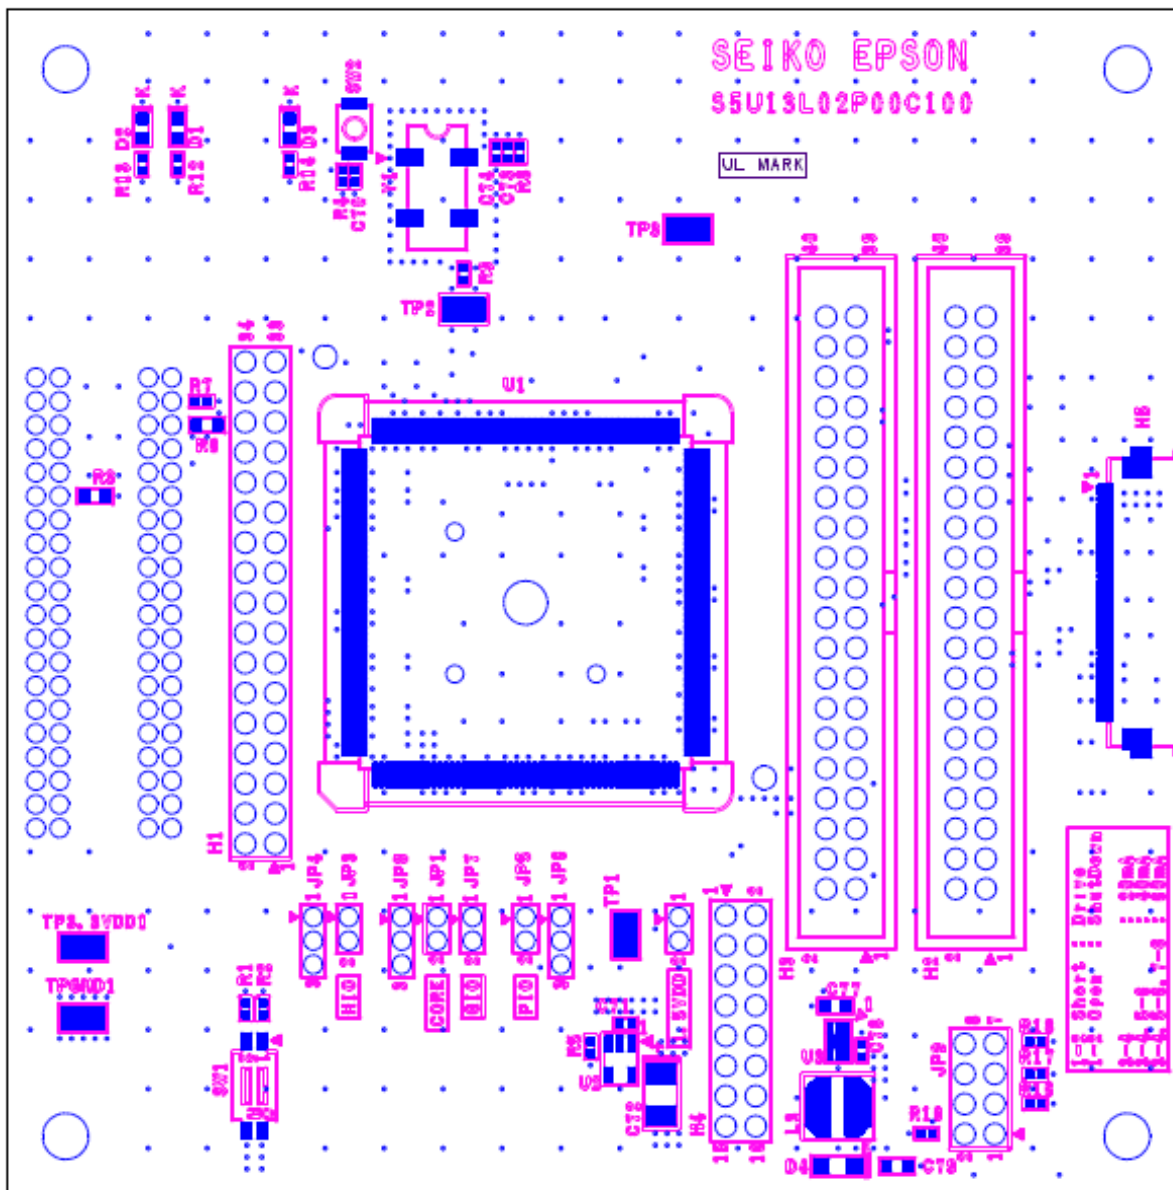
S5U13L02P00C100 Board Layout - Top View
